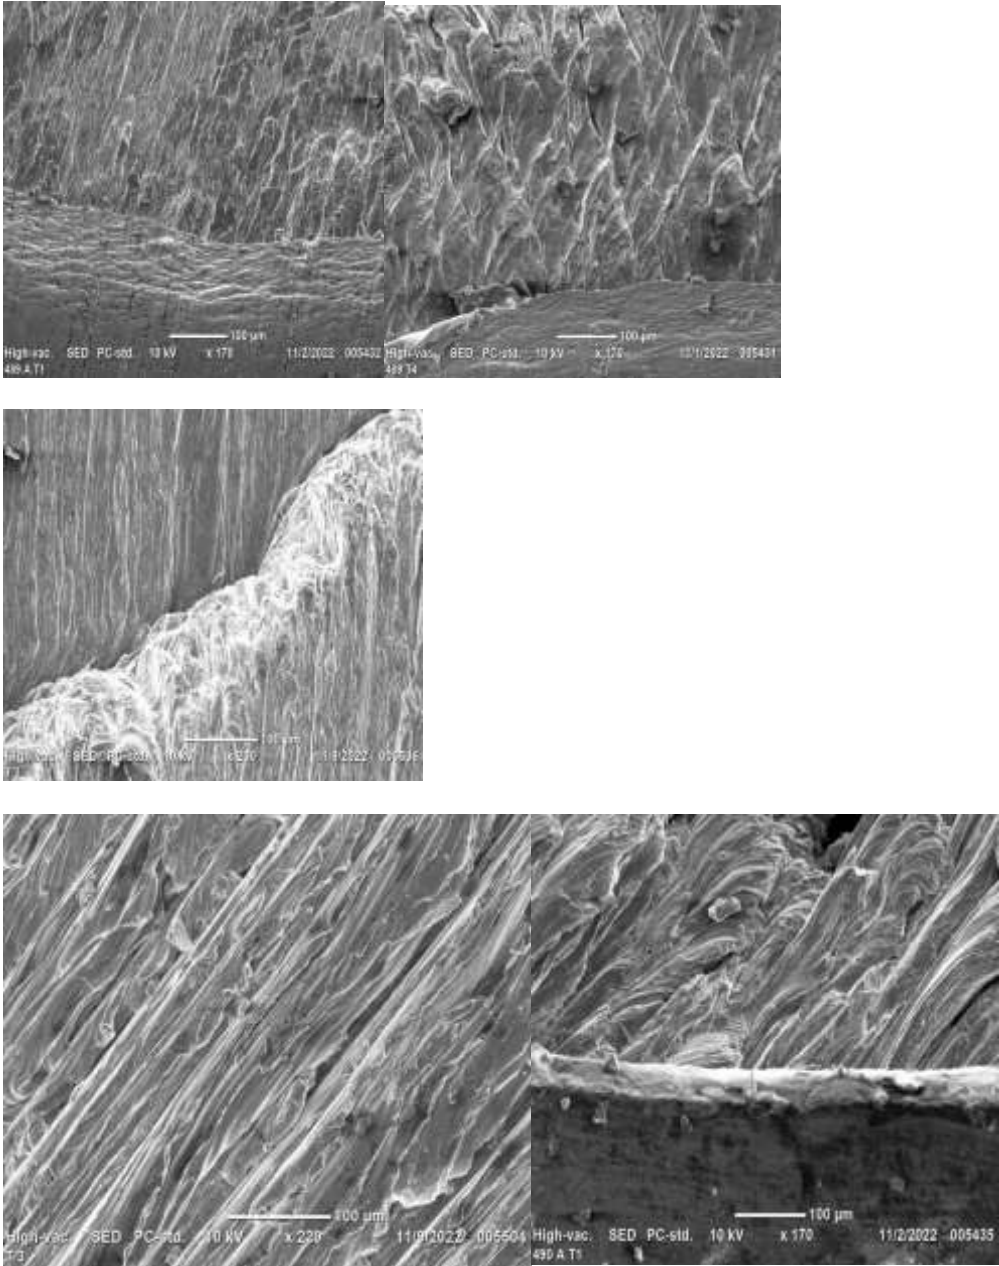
SEM fractographs tensile specimens in Sample 1 to 5
